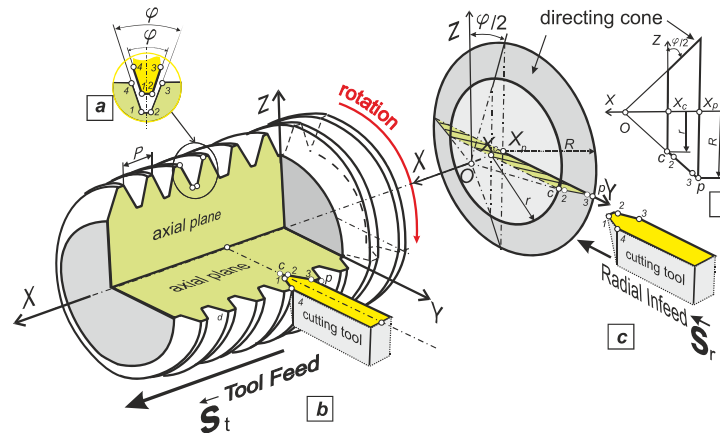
Scheme of forming a trapezoidal thread: a – coincidence of the cutting edge profile (yellow) and the profile of the resulting thread (lime). b – location of the edge of the thread cutter (yellow) in the axial plane of the thread (lime); c – location of the edge of the cutter 2-3 as the generator of the guide cone cp . X - thread axis, P - thread pitch, R - radius of the larger base of the guide cone, r - radius of the smaller base of the guide cone, X_p, X_c - coordinates of the points of the generating cone of the directrix on the thread axis X ; φ – thread profile angle, d – location of the projection of the cutting edge 2-3 in the axial plane ZX .
